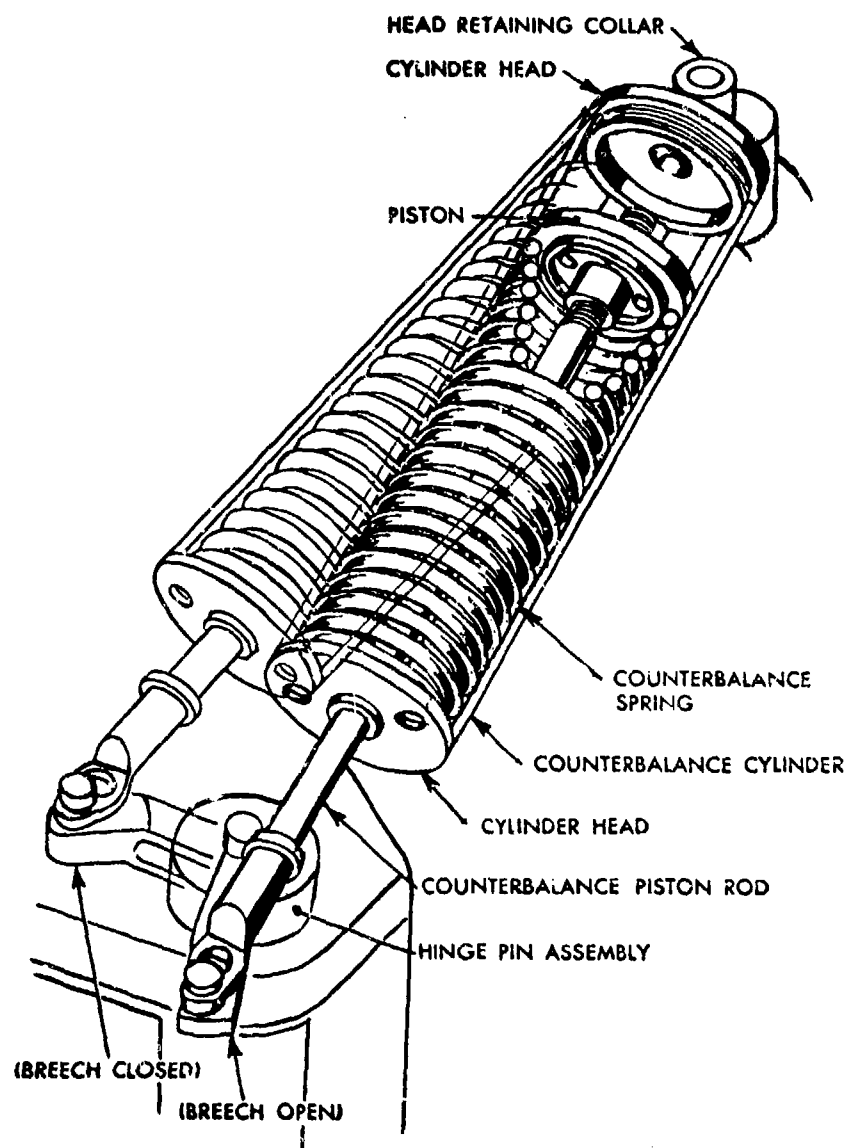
Counterbalance Mechanism — Interrupted-Screw Breech (Ref. 34)
